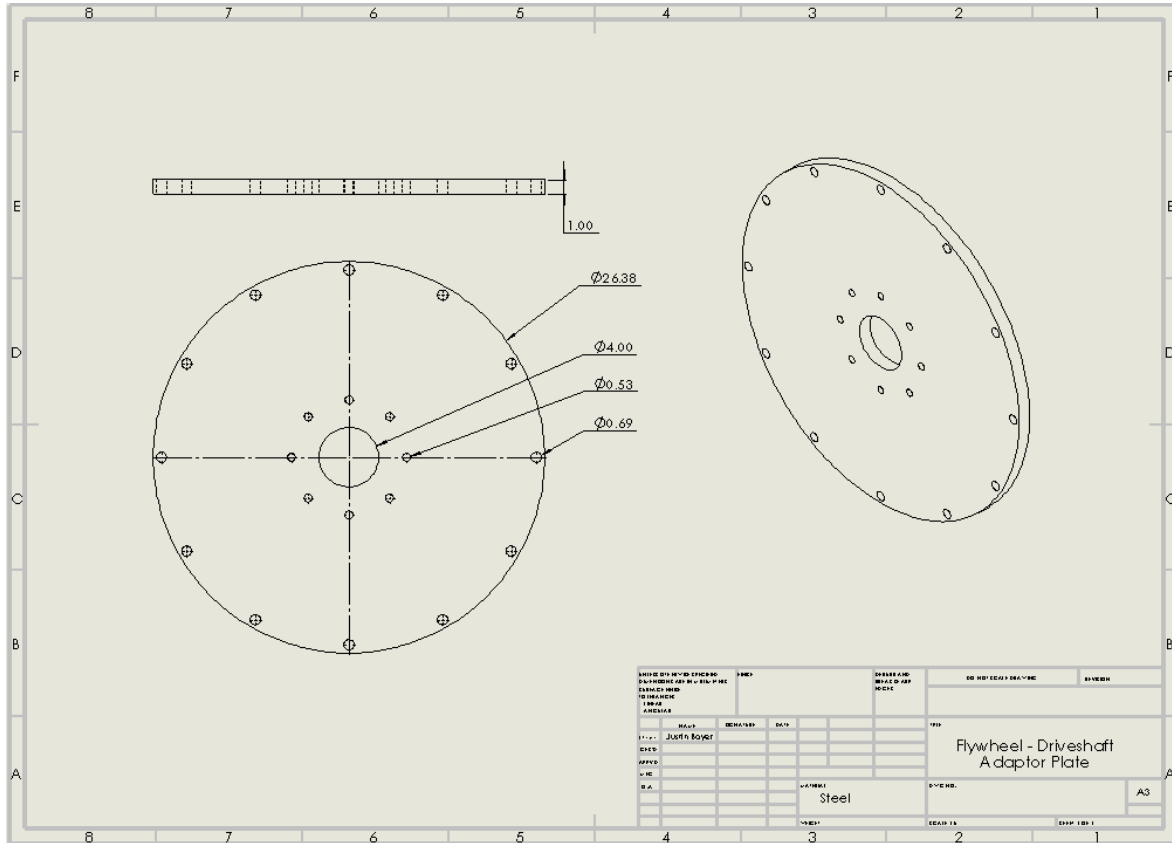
Detailed drawing of flywheel/ driveshaft adaptor plate.
